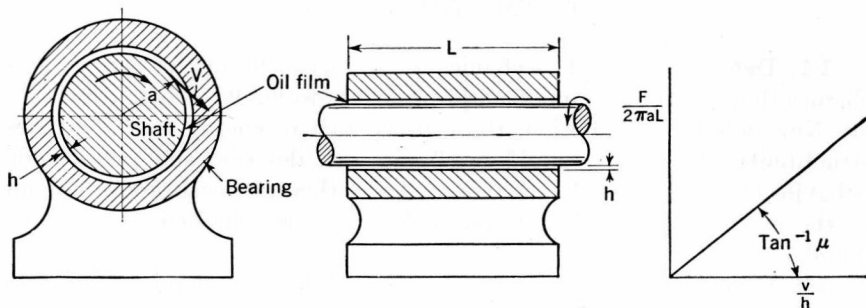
Oil viscosity causes shearing stress on the shaft of a flooded journal bearing.
